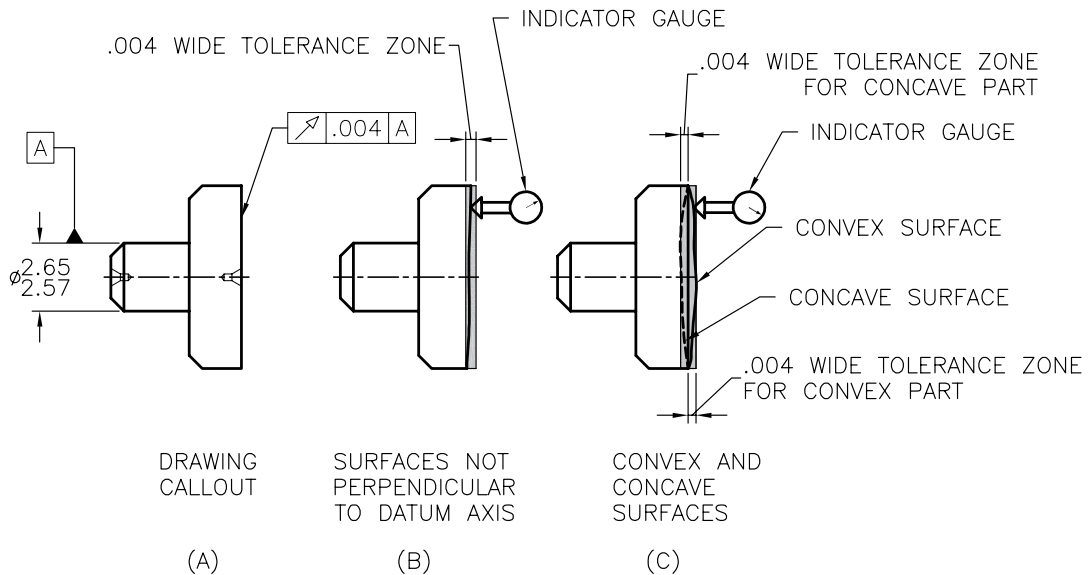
Circular runout for flat surfaces perpendicular to datum axis feature
